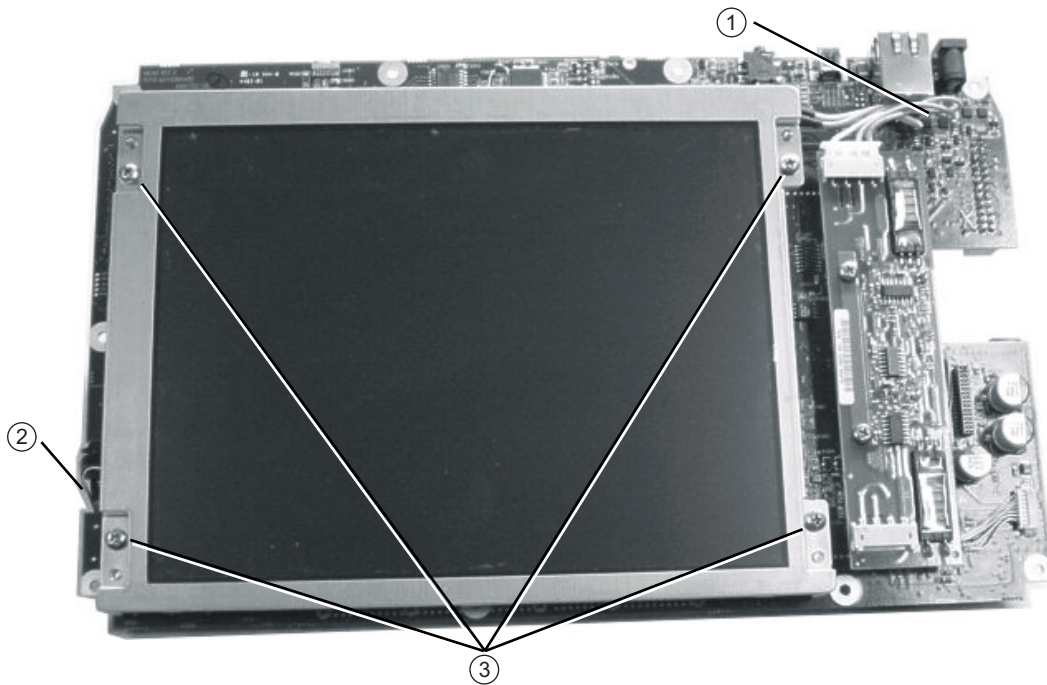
LCD Backlight Power Inverter PCB Assembly Screws and Cables
